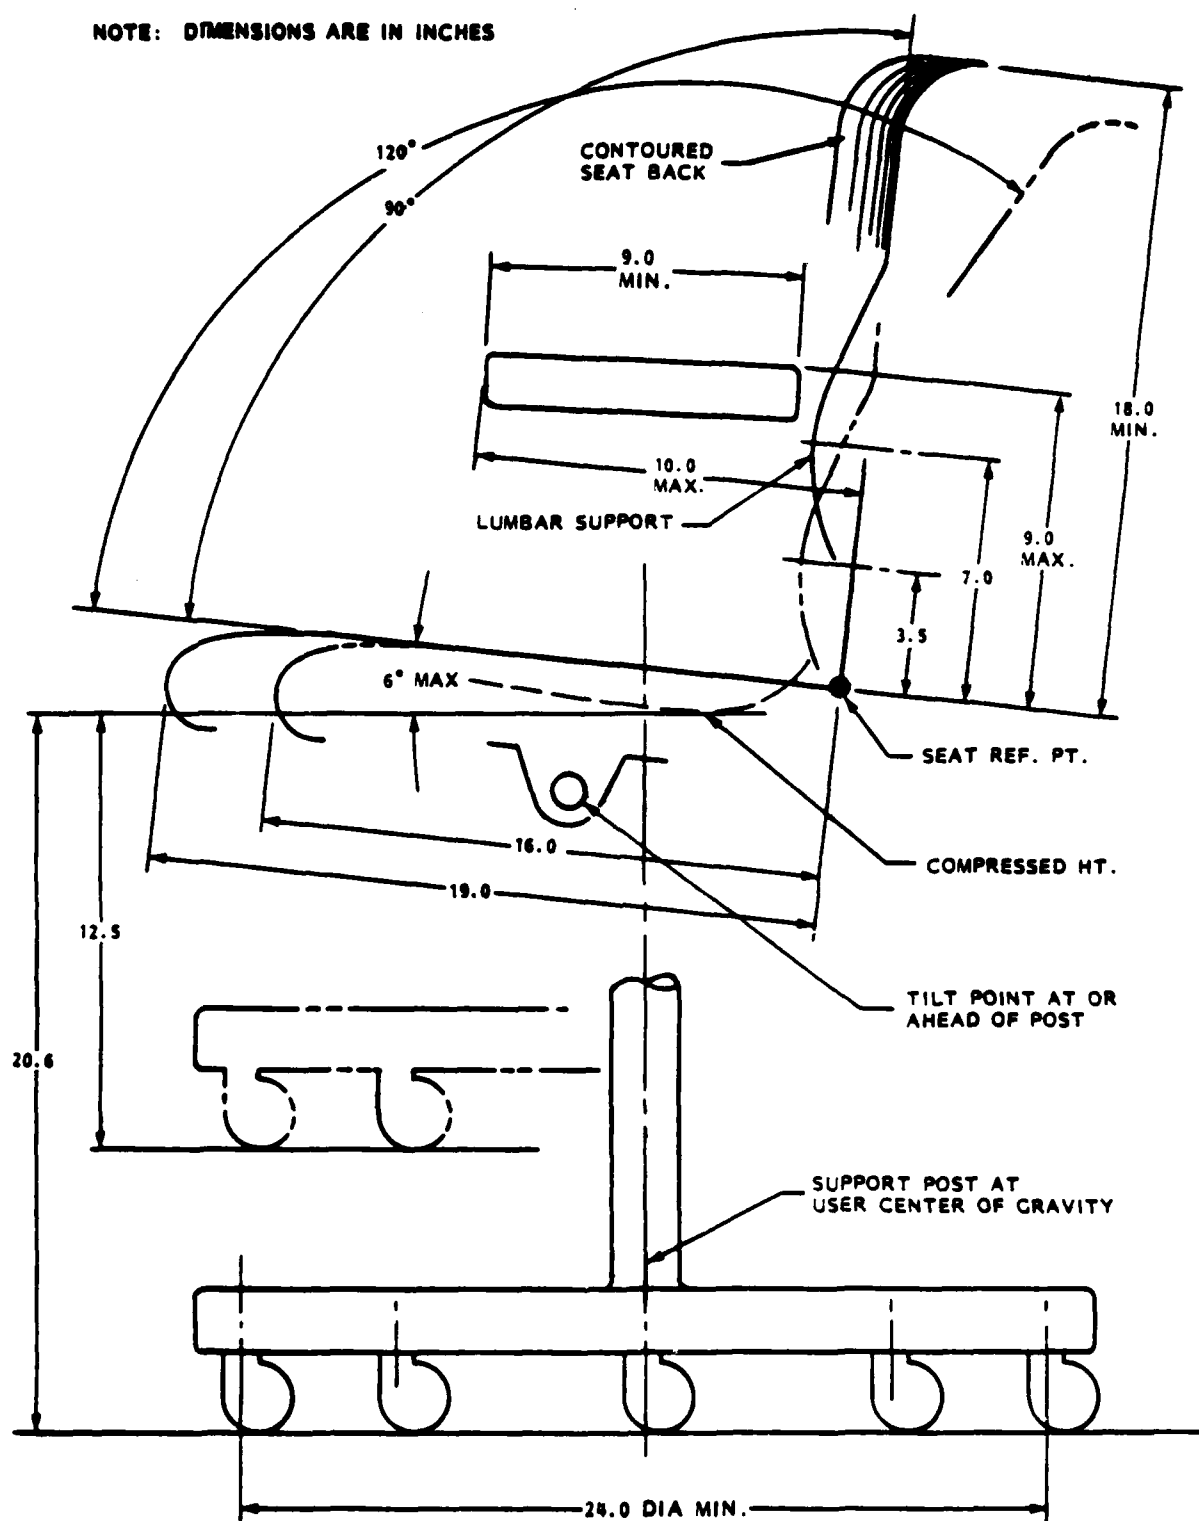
CHAIR DIMENSIONAL GUIDELINES
